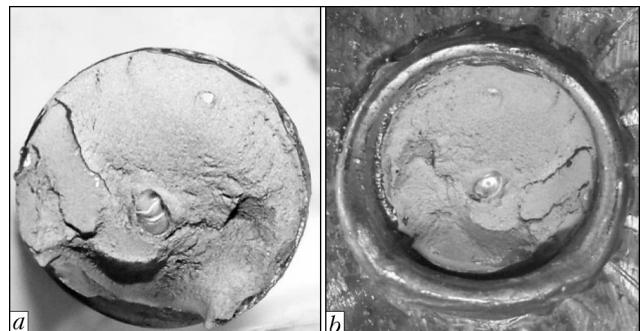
Internal weld defects in specimen 3 of first series: a – pores; b – lack of fusion
